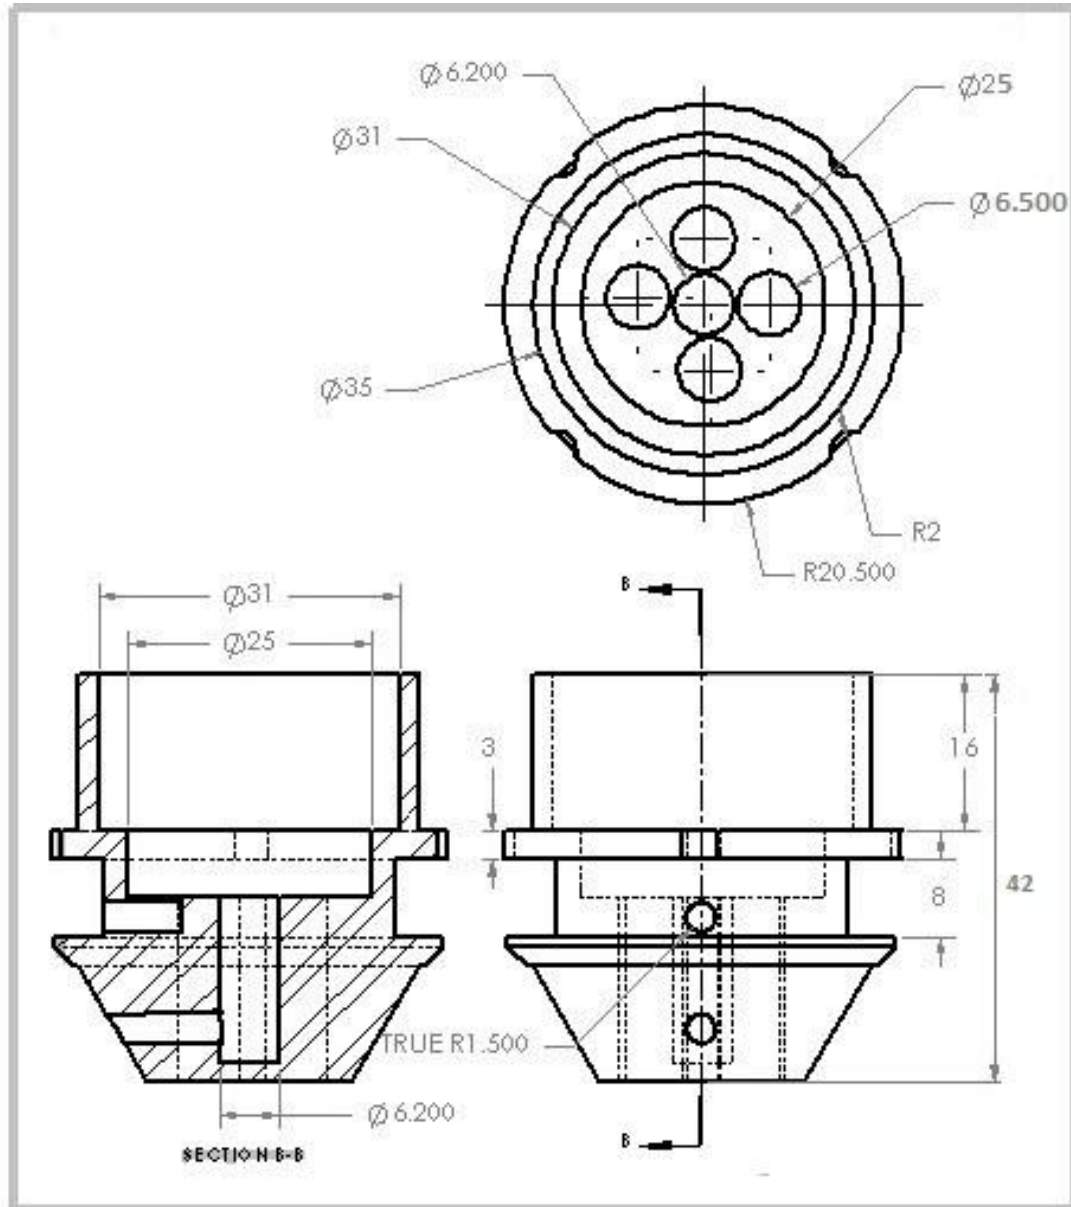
Technical drawing of the upper section (all measurements are in mm)
